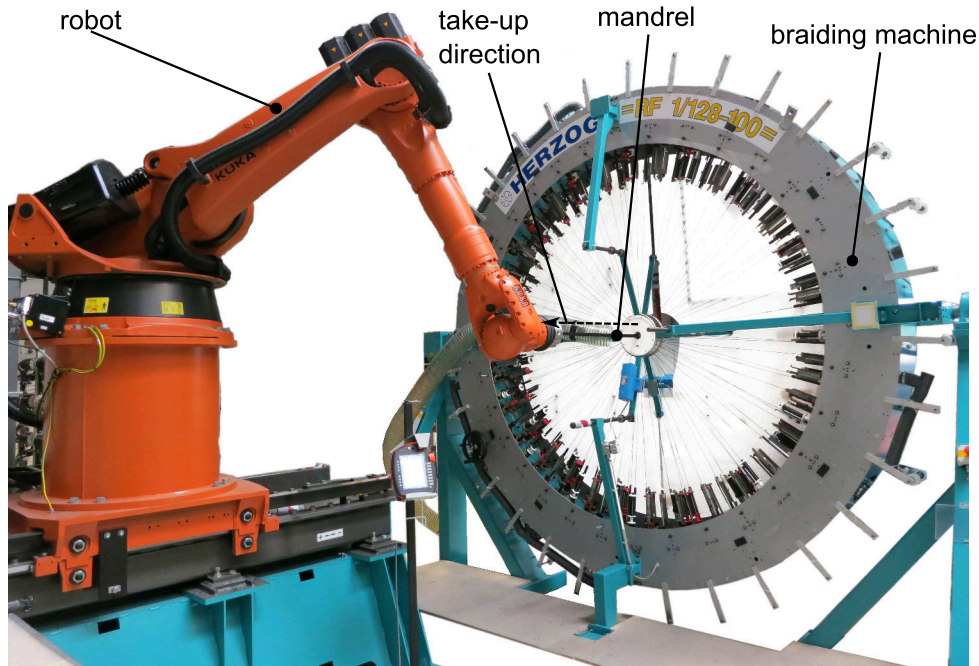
2D maypole braiding machine with 128 yarn carriers.
